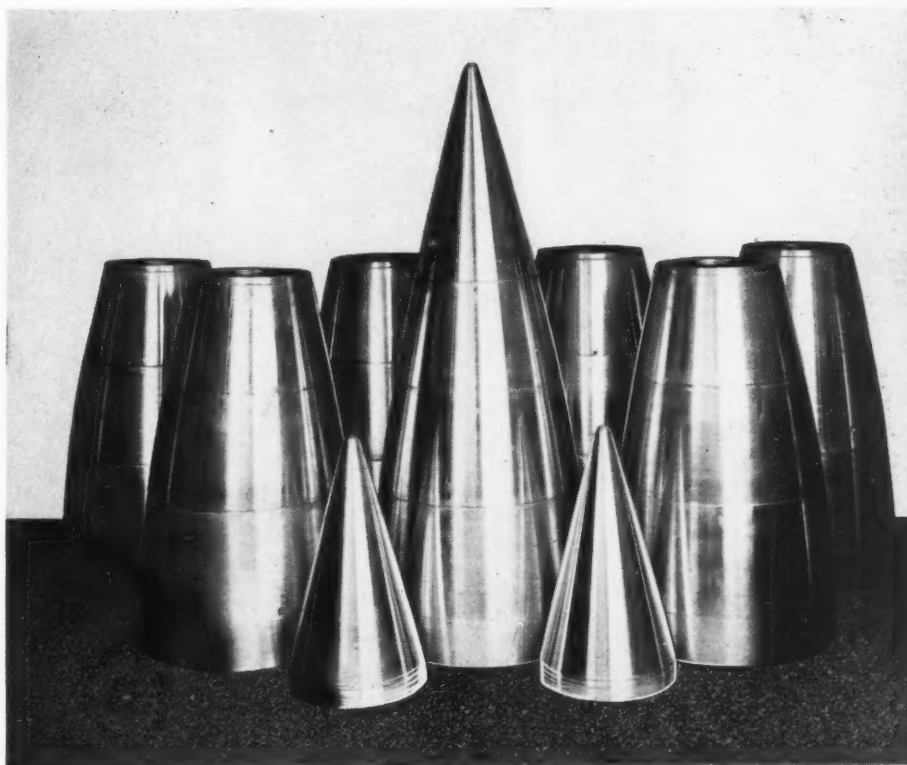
These spun nested segments of tail-cone assemblies are ready for the production-line spot-welding operation
